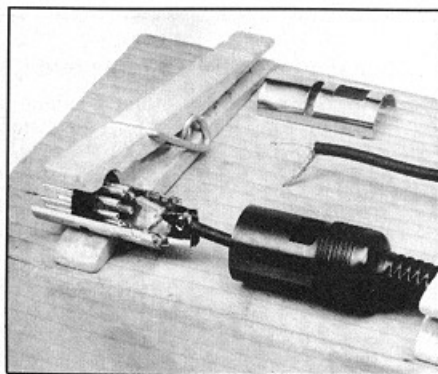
If you haven't caught on to the value of a soldering jig before now, installing a four-piece DIN plug can make a believer out of you! Here, one of the jig's spring clothespins holds the connector plug into the lower sleeve half while keeping both parts immobile. The other pin traps the cable and the connector shell. Above them lies a length of prepared-for-installation cable; above that, the upper sleeve half.
